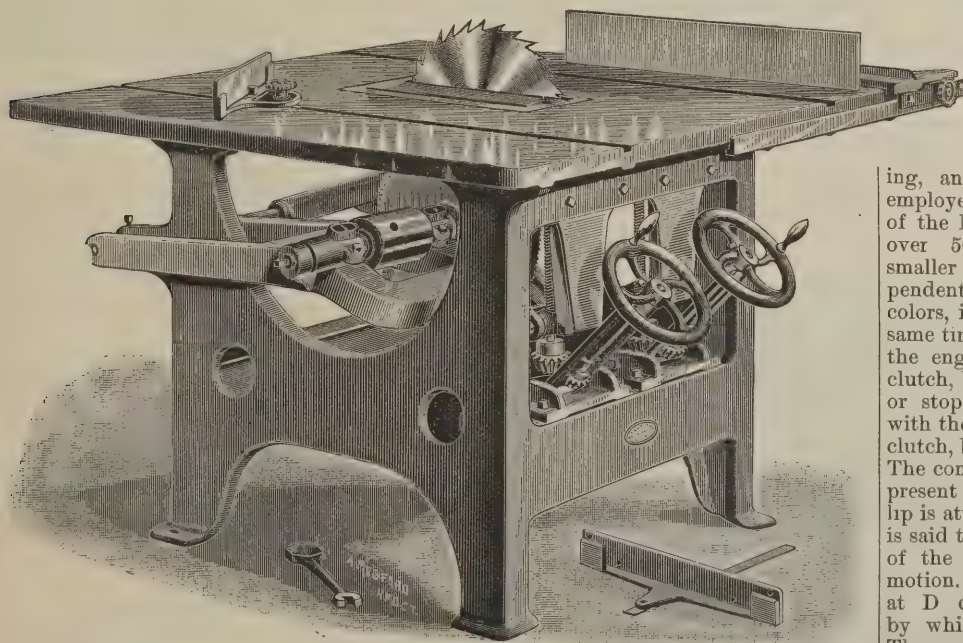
Double Saw Bench, Manufactured by Frank H. Clement.
